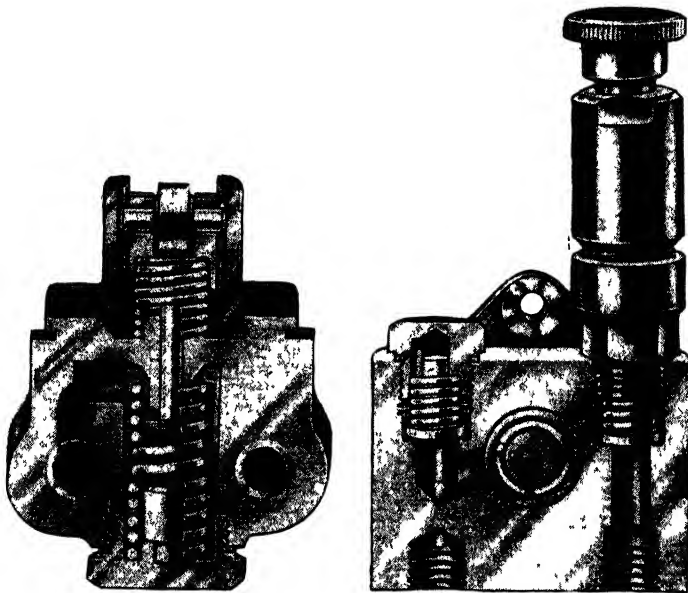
AMERICAN BOSCH TRANSFER PUMP WITH PRIMER.
